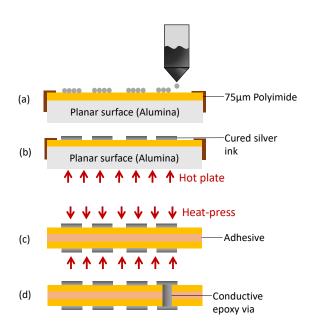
Fabrication steps of the double-sided WPT coil: (a) silver ink printing on a planar polyimide substrate, (b) silver ink curing on a hot plate, (c) thermal-pressing of the single-sided top and bottom coils, (d) the assembled double-sided coil showing the conductive epoxy via.
